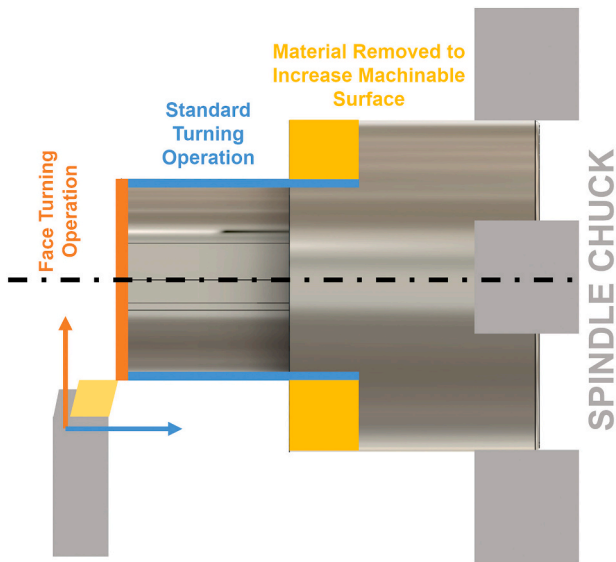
Pre-machining operations applied to the sectioned neck region to ensure the workpiece surfaces were parallel with the machine axes.
